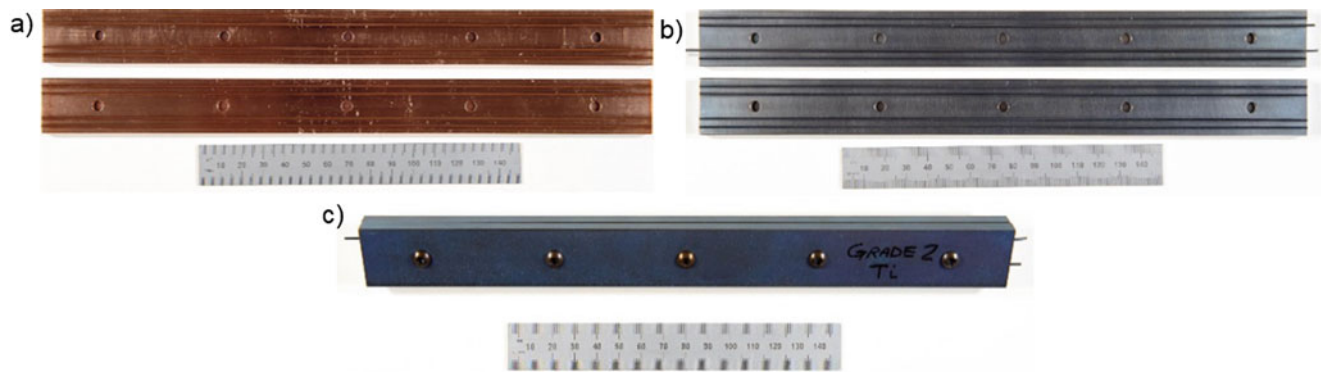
Stress-relief fixtures for straightening the wire samples: (a) inside view of copper, (b) inside view of iron, and (c) assembled view of titanium
